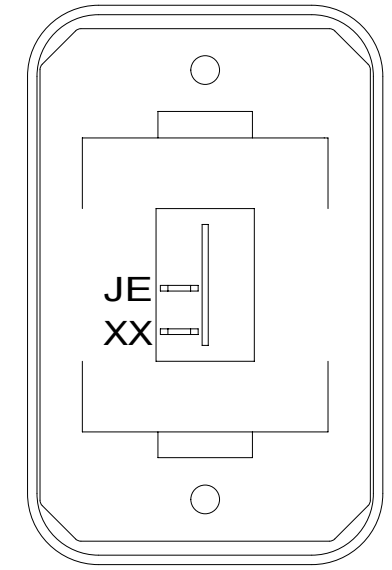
CHT SCREW G11-06-10U (6)
